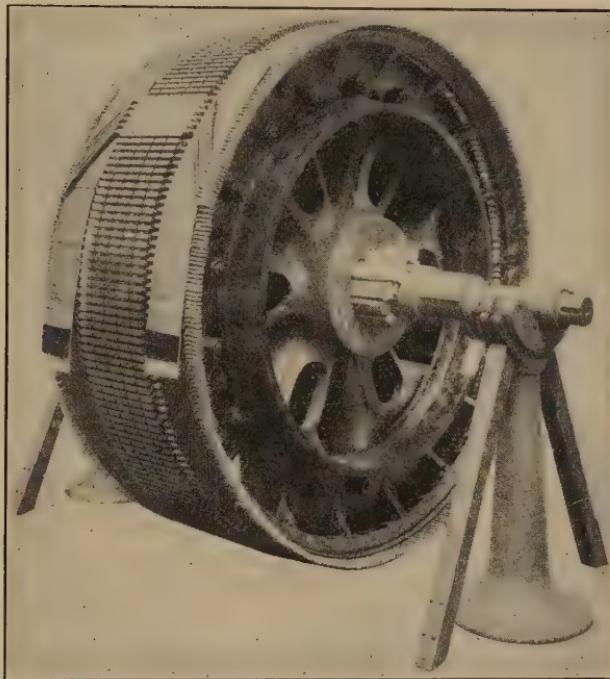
Photo of lap-winding element on armature. (General Electric Company.)
